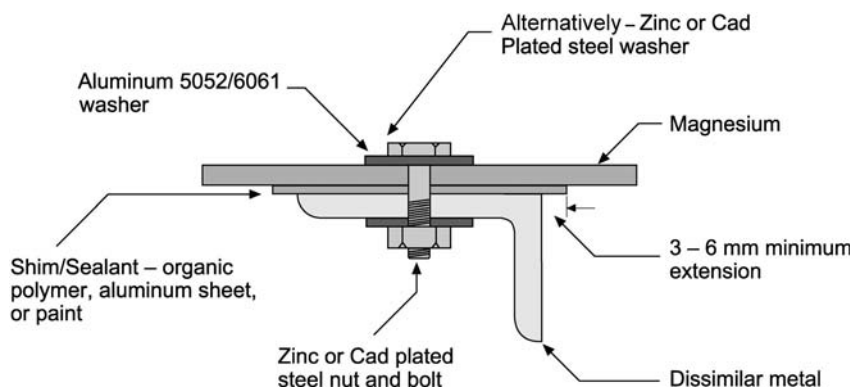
A bolted magnesium assembly using good assembly practices for the control of galvanic corrosion
